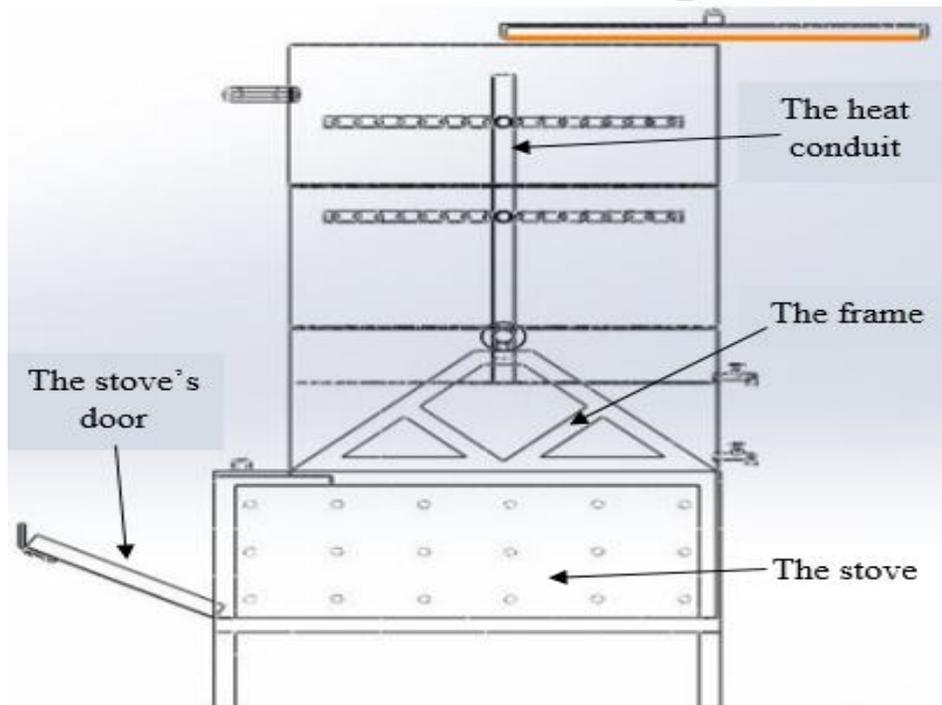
Technical drawing showing the sectional view of the assembled designed device
